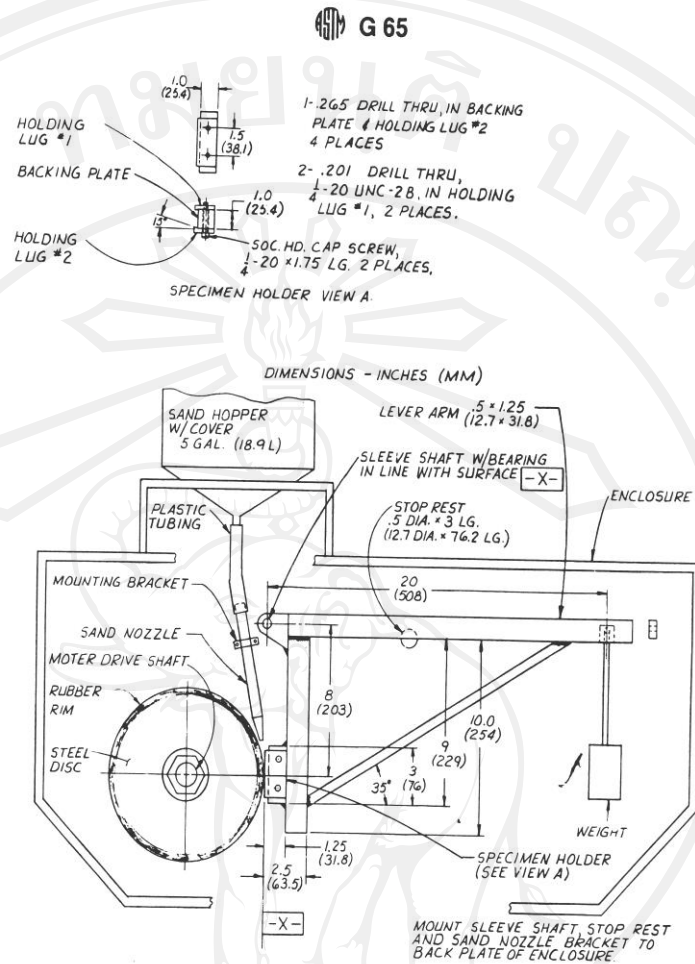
Dry Sand/Rubber Wheel Abrasion Test Apparatus
